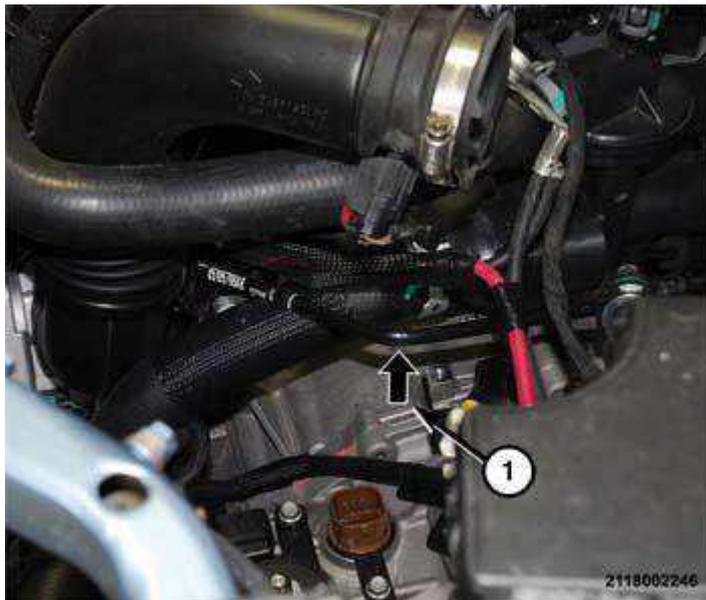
Ground Cable & Transaxle Bellhousing Bolt
